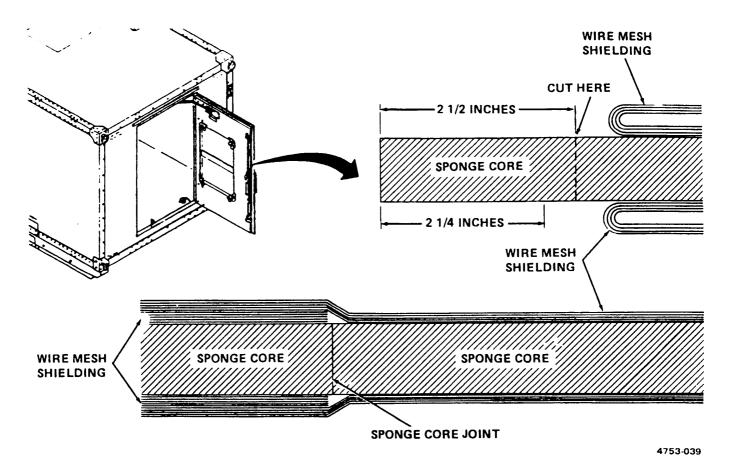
RFI/EMI Shielding Gasket Replacement.
